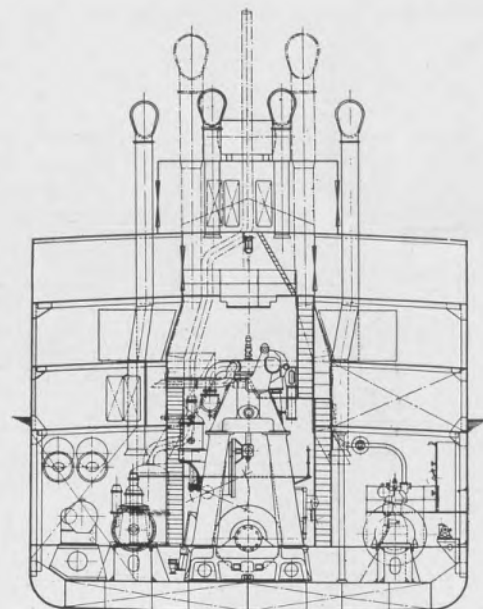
Engine-room with 1,800 b.h.p. Vulcan-Werke engine
